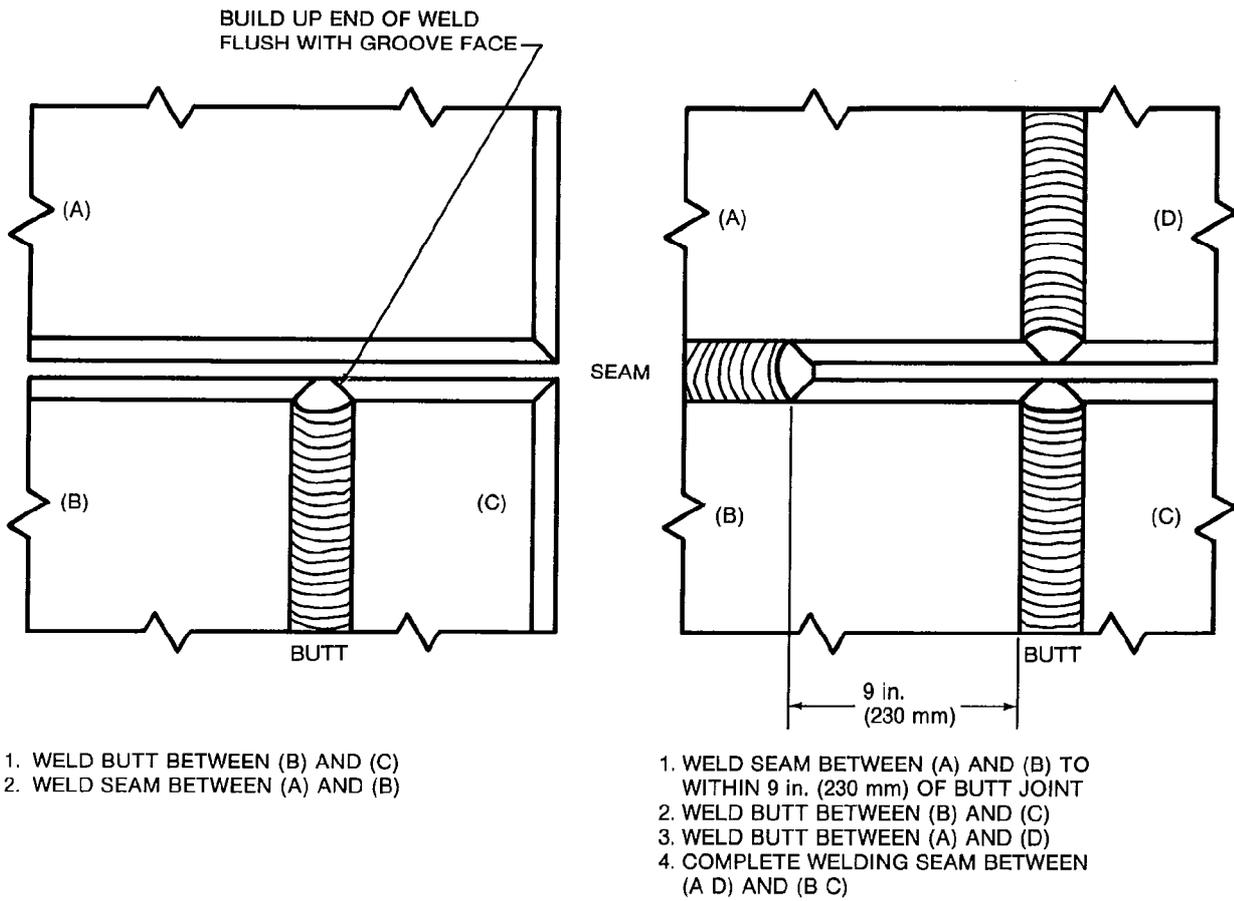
Welding Sequence at Intersection of Butt and Seam
